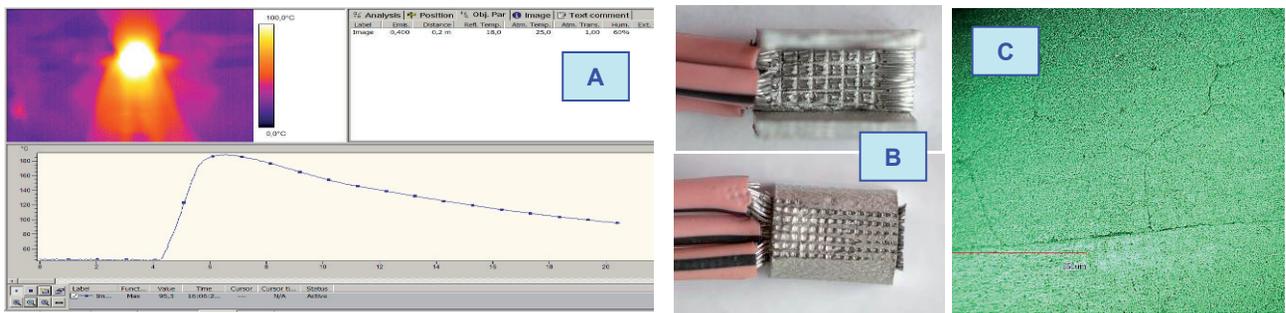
Thermography analysis and digital microscopy using HIROX 1300; A – thermography analysis; B – macro image; C – ultrasonic welded joint
